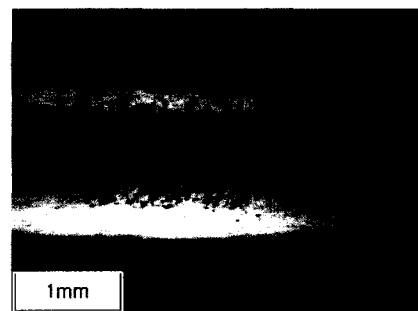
Weld cross section for Experiment 1-1(P)
